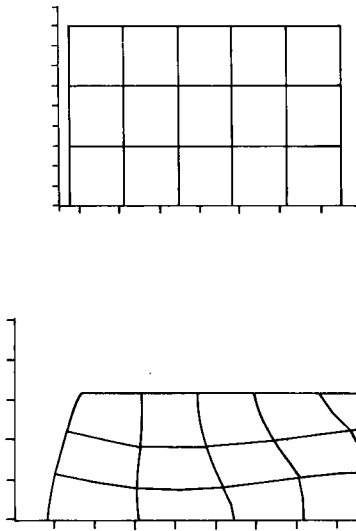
Thin specimen: cold forging; 29.5 per cent reduction
